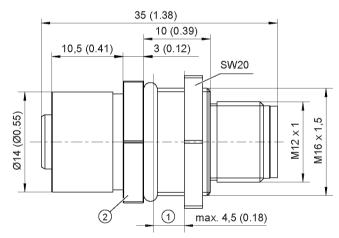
Dimension drawing, DRIVE-CLiQ cabinet bushing with M12 plug/socket, all data in mm and (inch)
